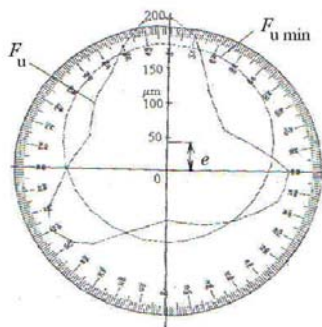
Workpiece profile in the vicinity of chuck with elastic three-jaw
